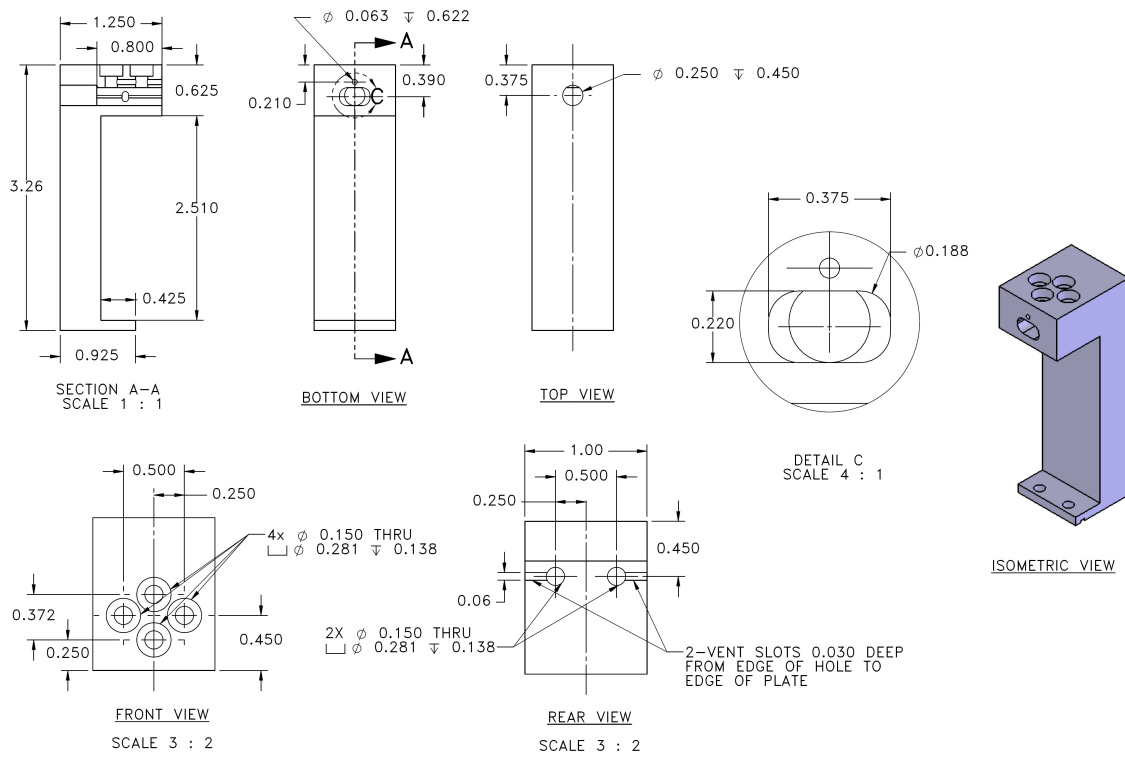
Technical drawing of the RFA bracket. All measurements are in inches
